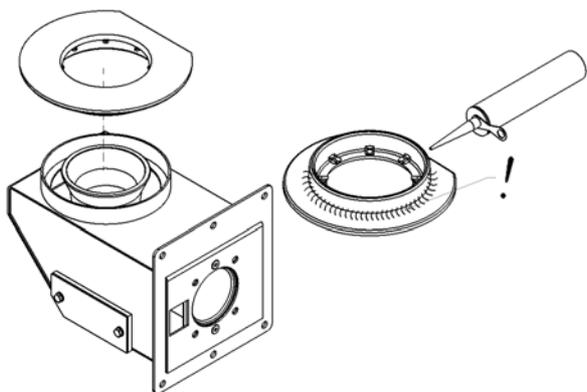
Assembly of the emergency fire extinguishing equipment
